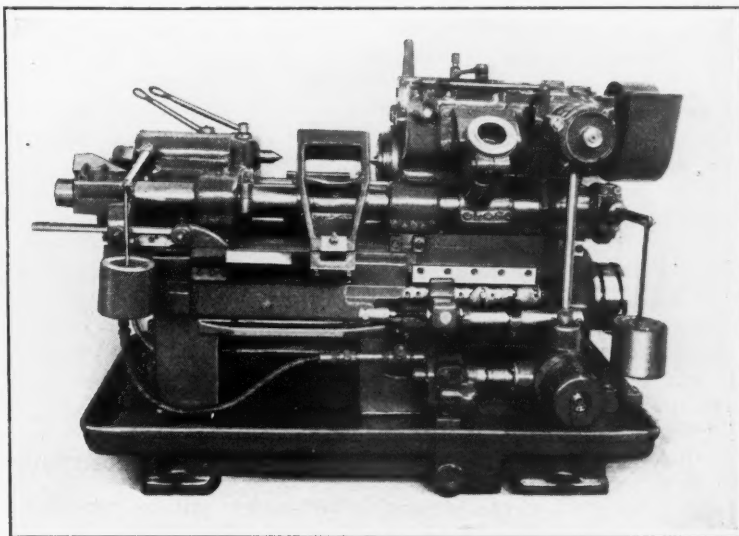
Rear View of Fay Automatic Equipped with Bevel Attachment
